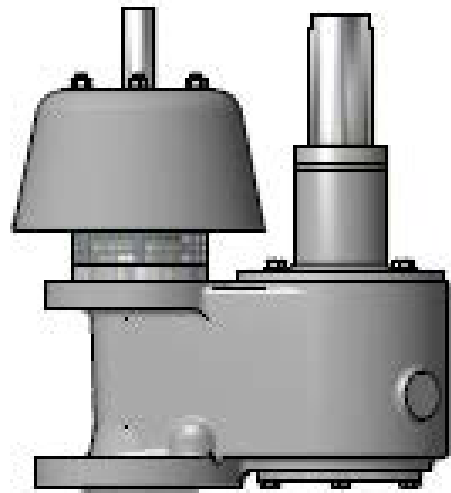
Type 4020HV Pressure and Vacuum Relief Valve
